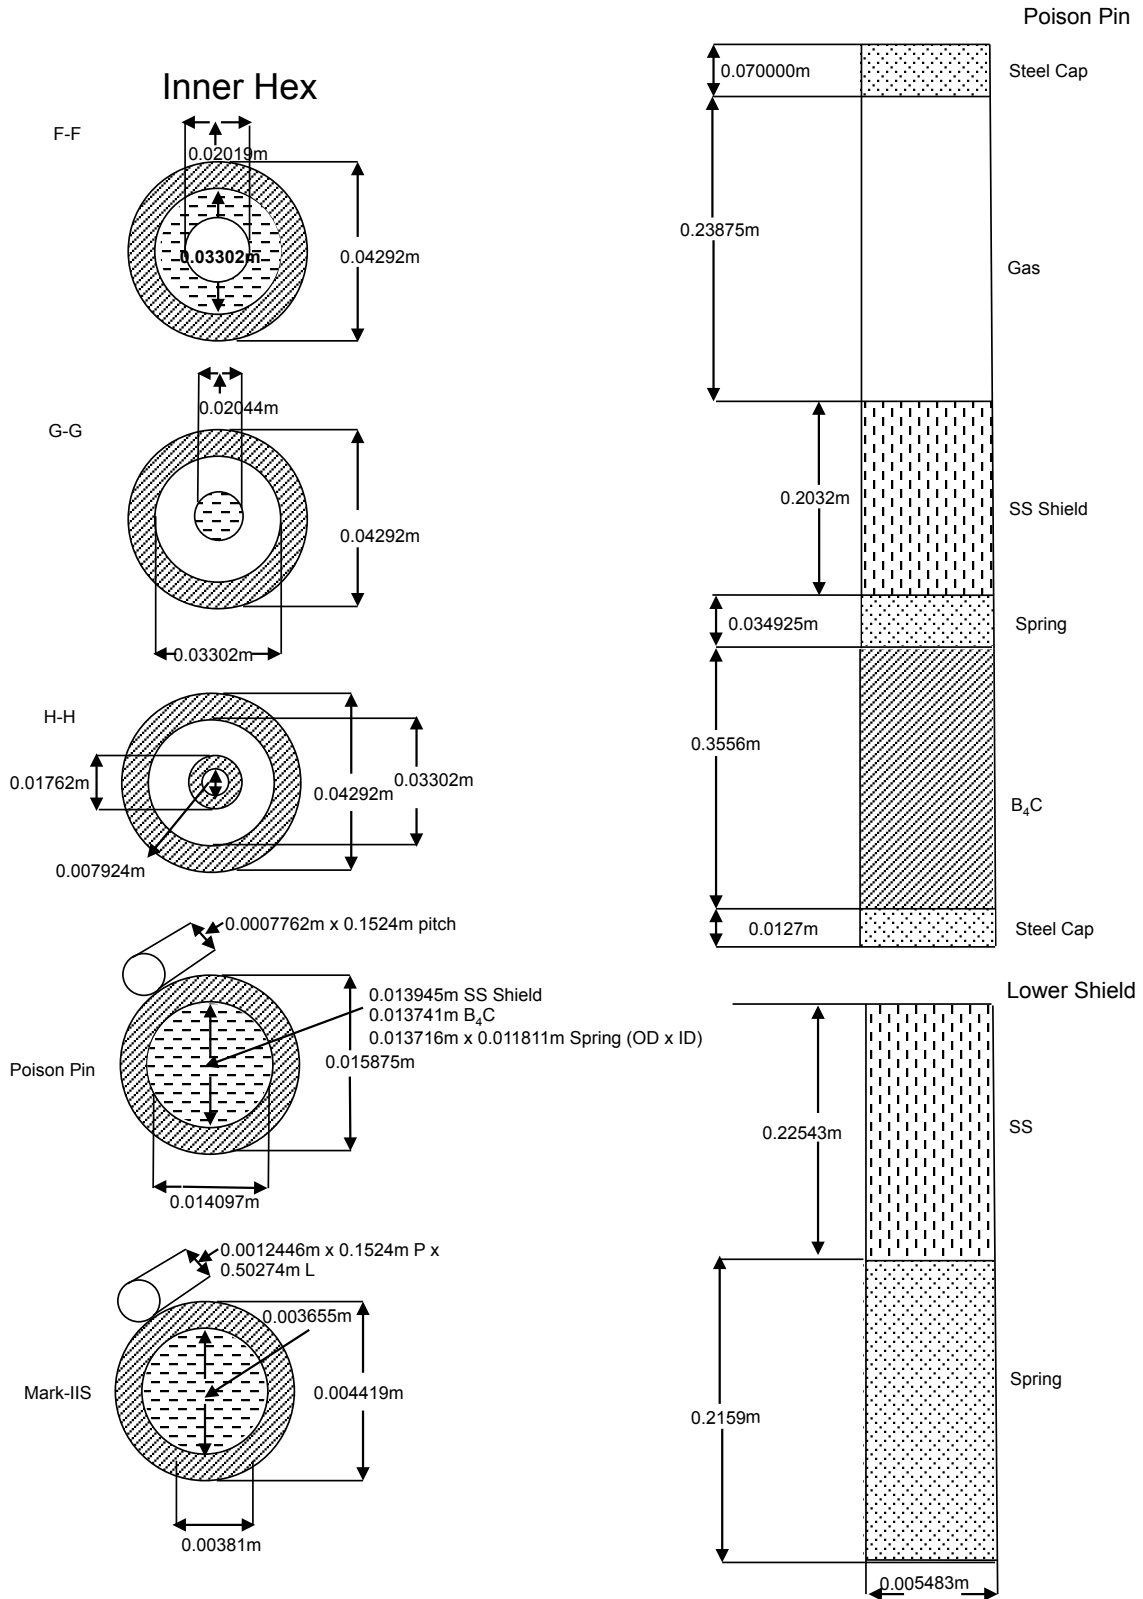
High Worth Control Rod elevation and plane sections
